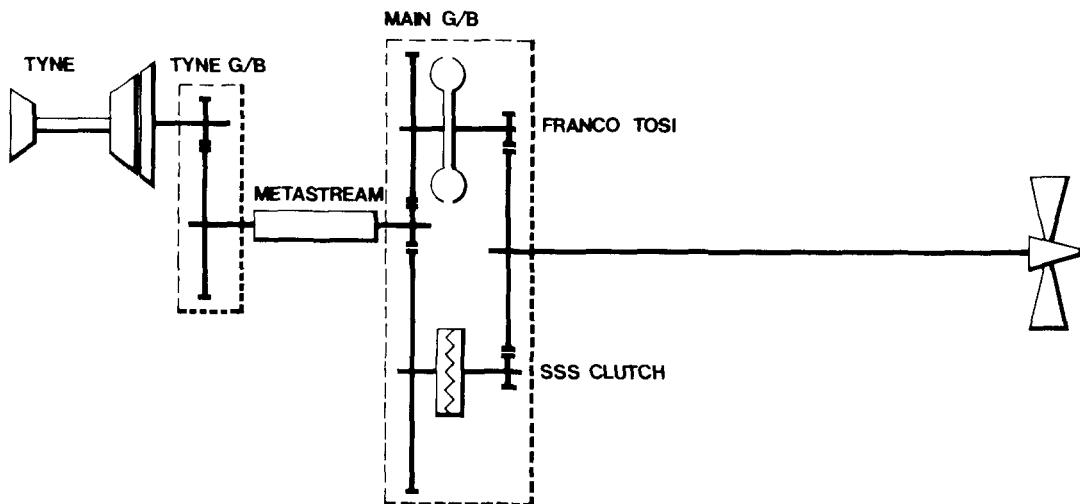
ARRANGEMENT OF FRANCO TOSI COUPLING IN THE 'TARANAKI' GEARBOX
